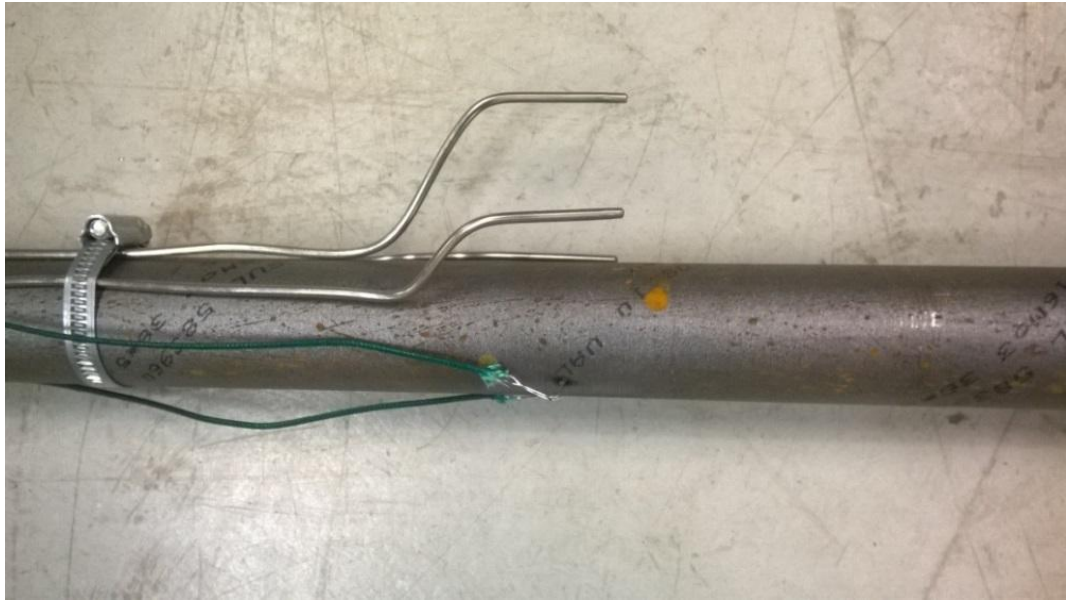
Welding equipment and a test tube under construction.
